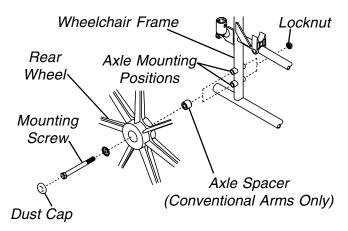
REMOVING THE EXISTING REAR WHEEL - PERMANENT AXLES
